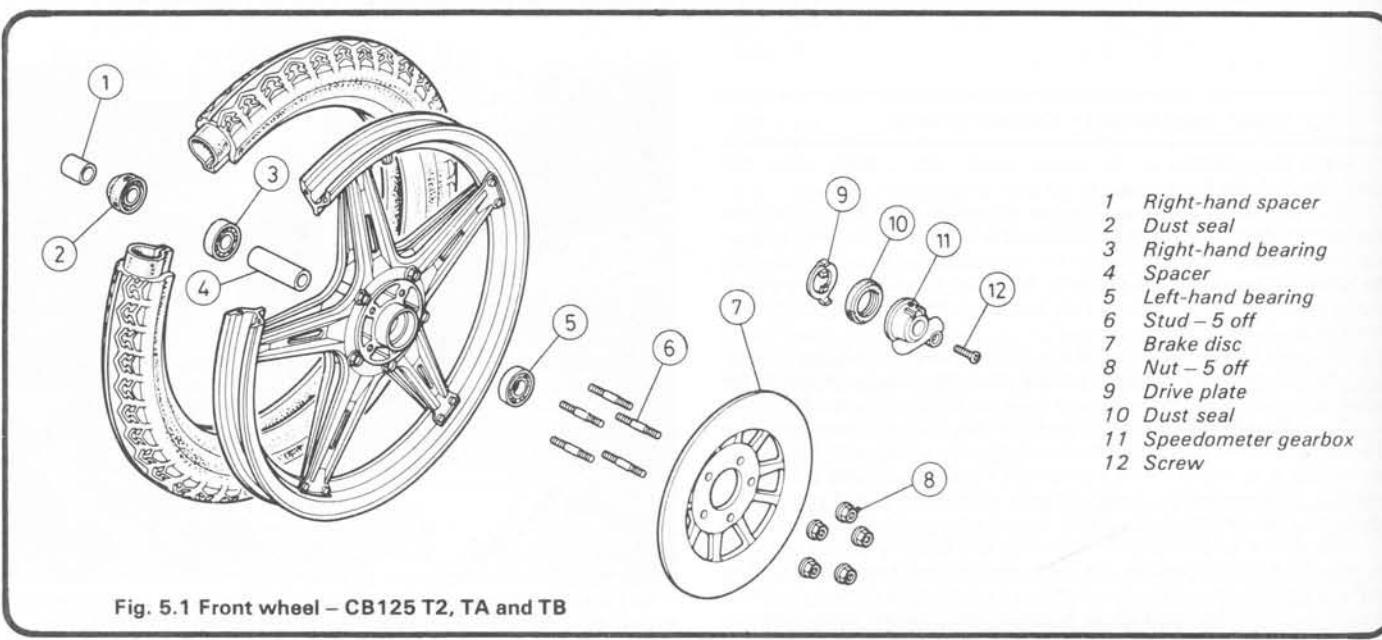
Front wheel – CB125 T2, TA and TB
